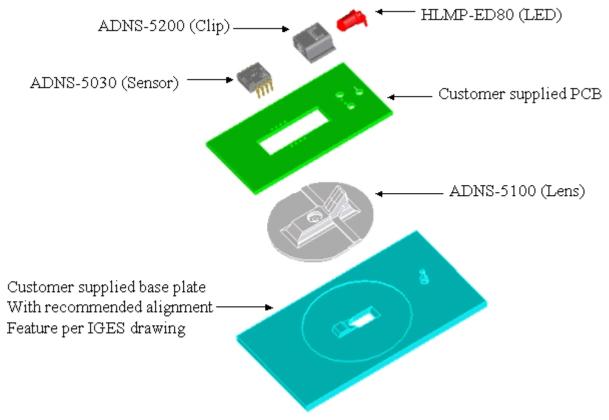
Exploded view drawing of optical tracking engine with ADNS-5030 optical mouse sensor.
